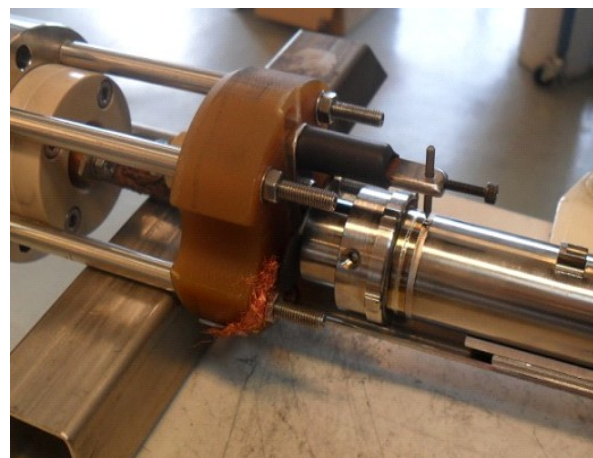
The establishment process of the electrode in TIG seal spot welds to fill up gas to an insulated test channel.
